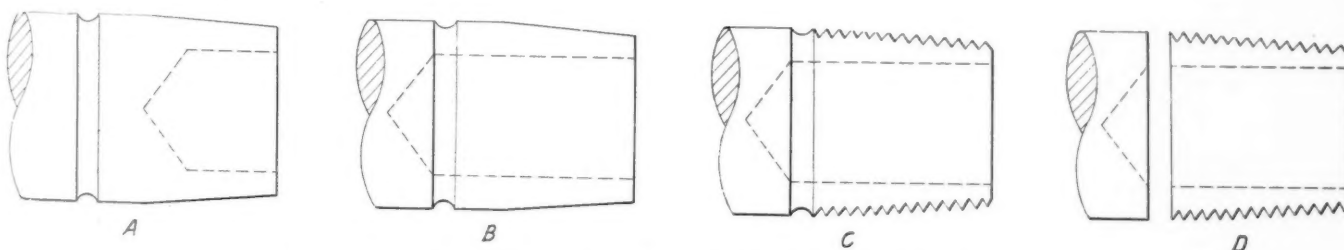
Successive Operations in Making Sleeves for Flexible Staybolts
